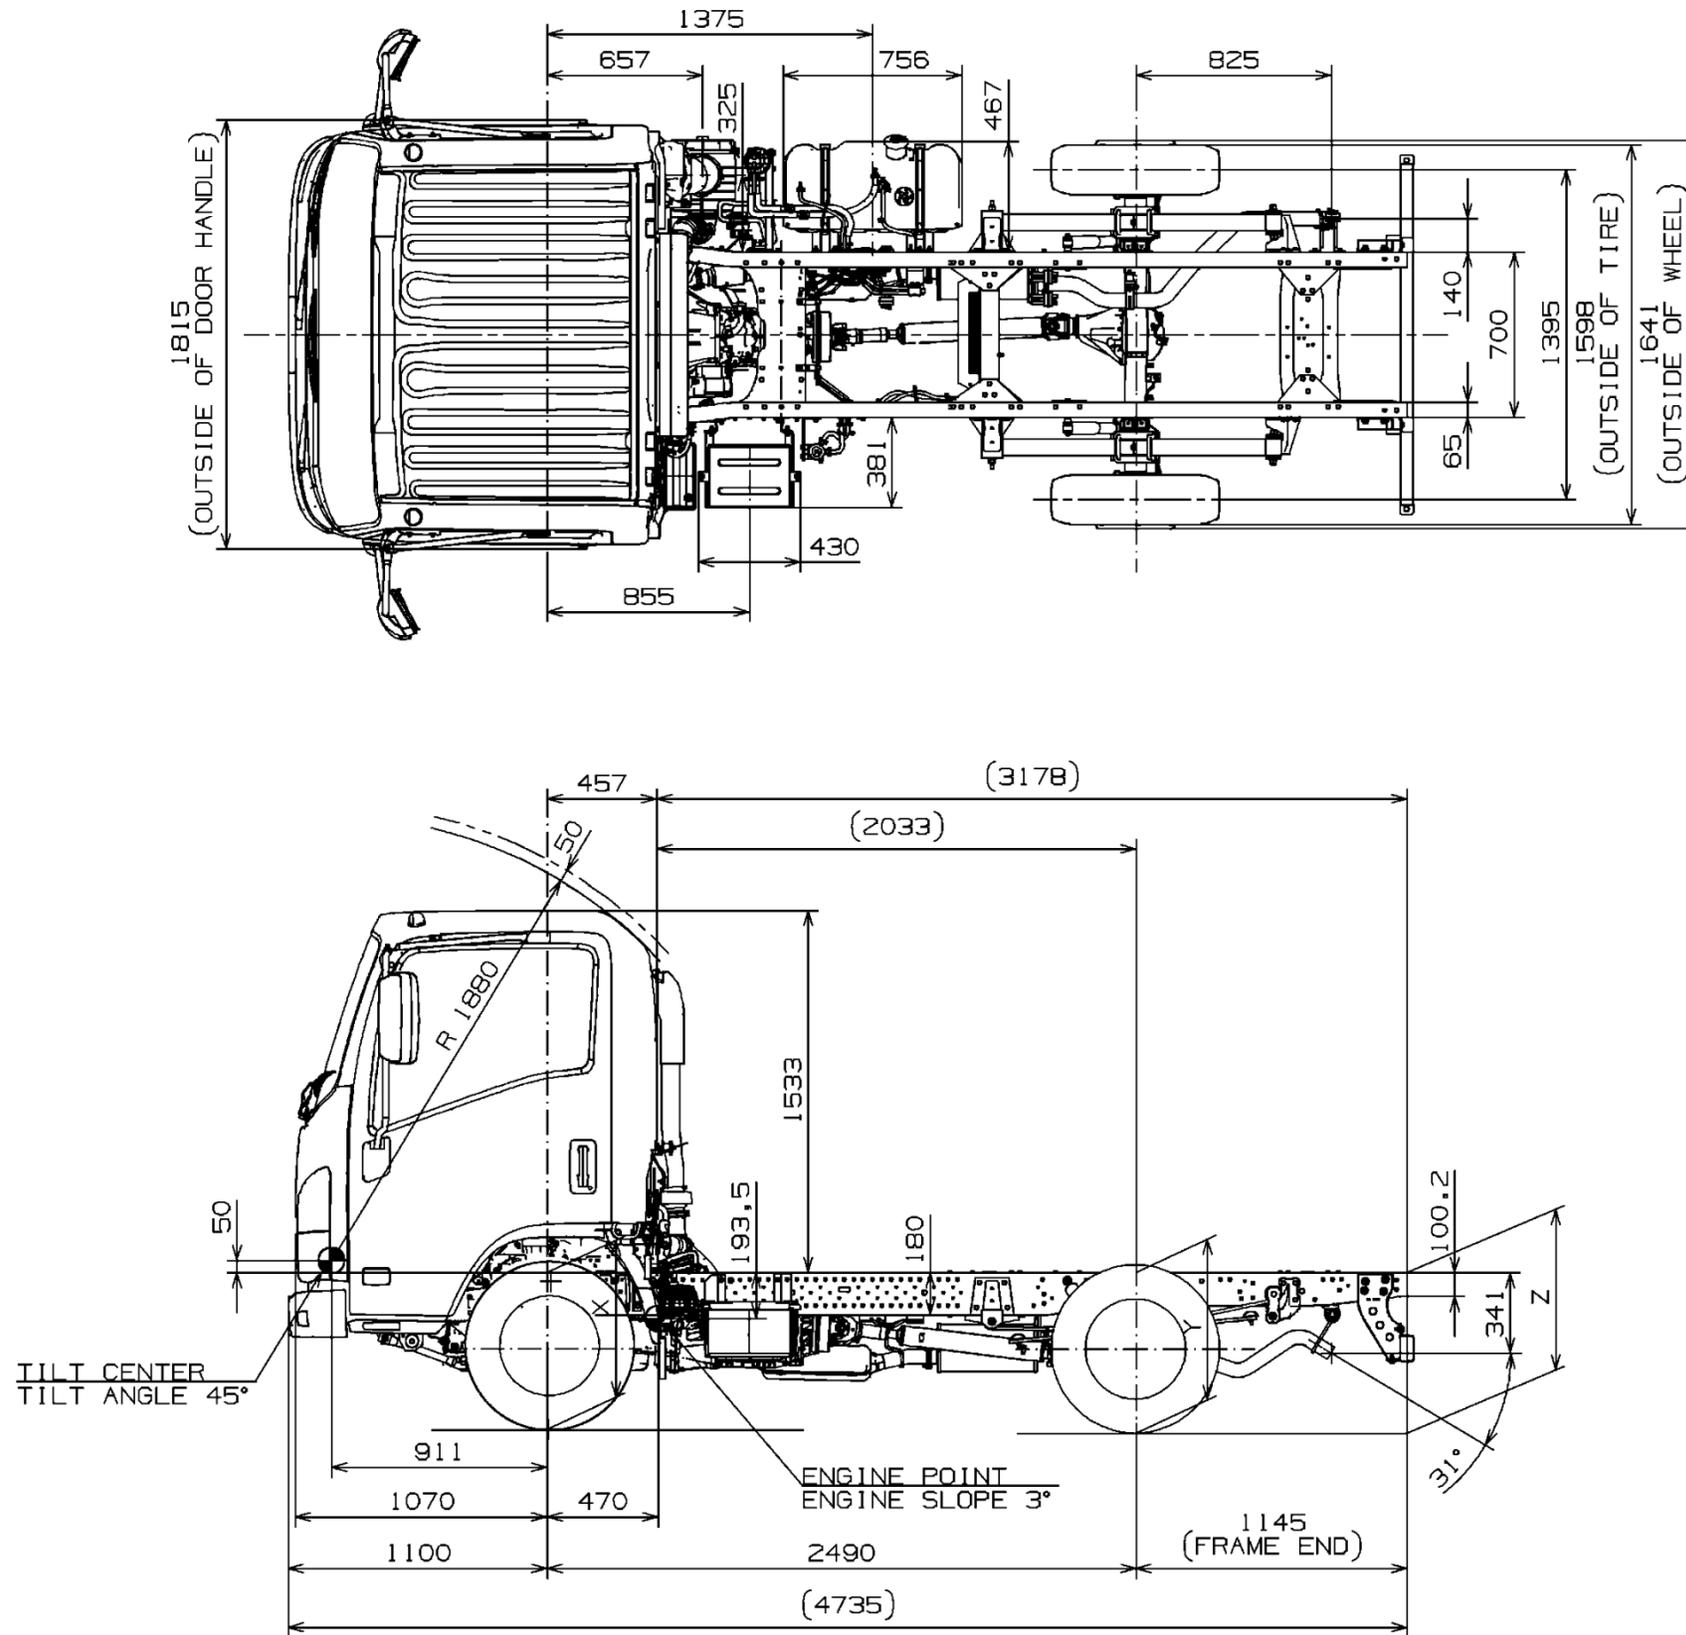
Cab Chassis Drawing NLR85AL-ED5AYEN
